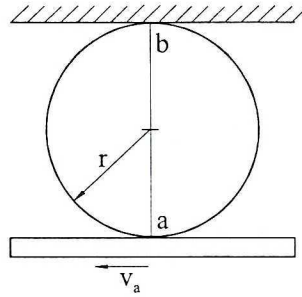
Forming pieces into spherical forms between moving and fixed surfaces
